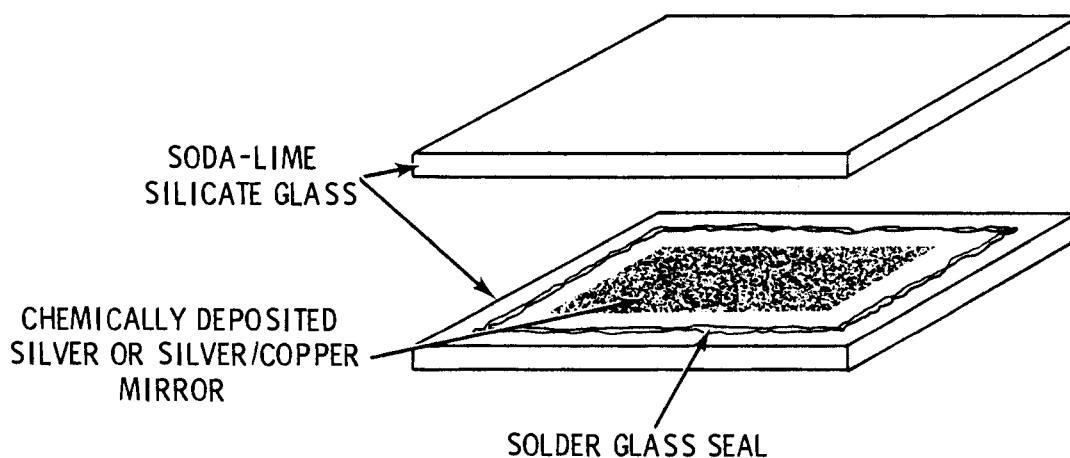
Schematic Diagram of Solder Glass Edge Sealed Laminated Mirror
